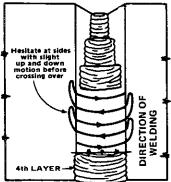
Multi-Layer Deposit Vertical Butt Weld
